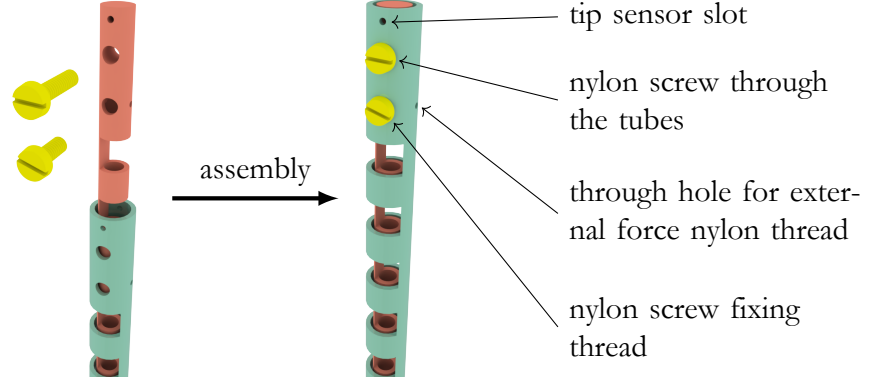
Exploded and assembled views of the tip of the prototypes.
